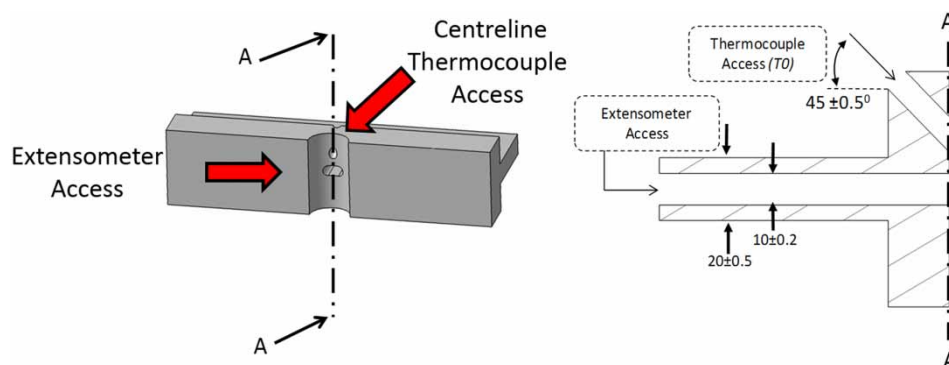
Isometric and cross-sectional view of instrumentation access for weld centreline temperature and local weld metal displacement.
